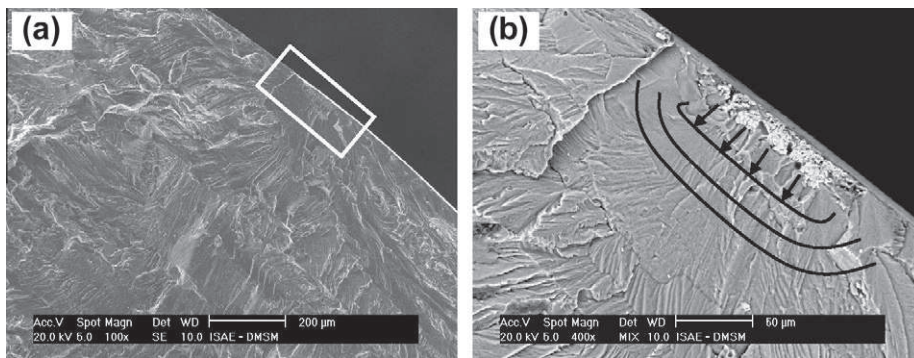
Fracture surfaces of machined specimen, at low and high magnification showing fatigue crack initiated by Al_7Cu_2Fe particle and subsequent crack growth.
